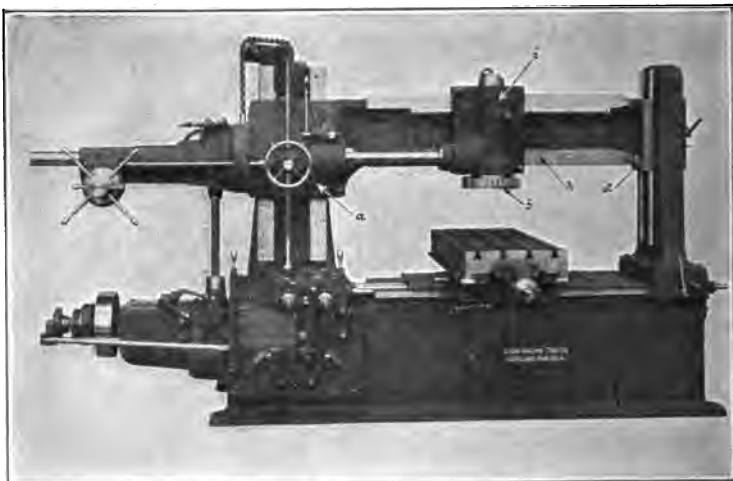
AND 75. HORIZONTAL BORING MACHINES 261
